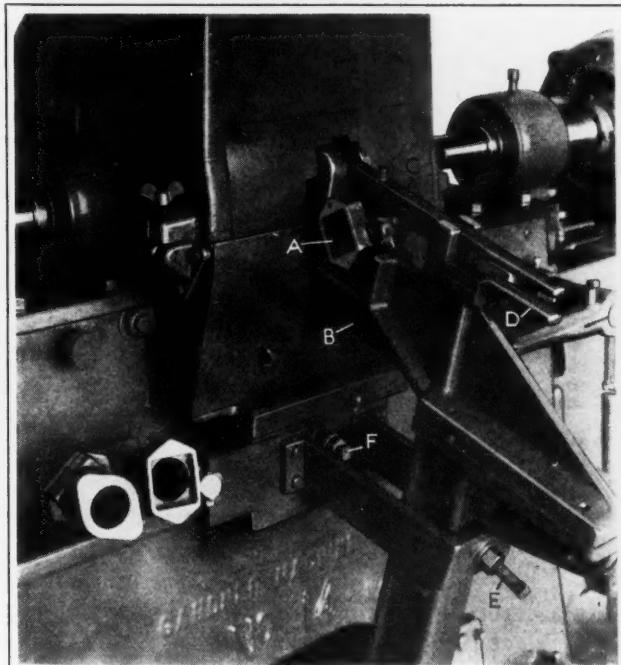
Attachment that Enables Small Castings to be Loaded Rapidly
